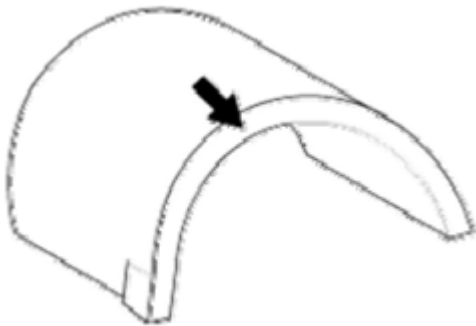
Identifying Connecting Rod (Upper) Bearing Mark
